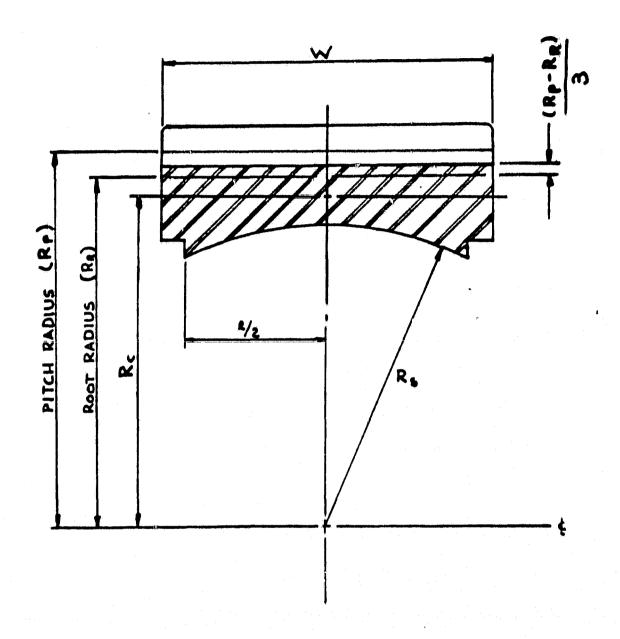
PLANET GEAR OUTER RING CROSS SECTION
